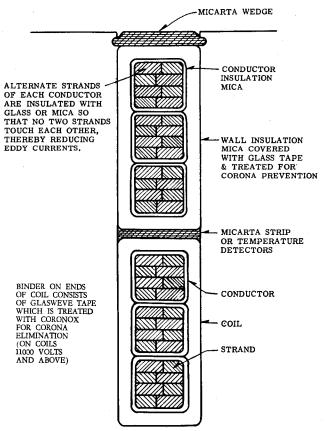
A Cross Section View Showing Typical Construction of Armature Coil with Class B Insulation (6900 Volts and Above).
